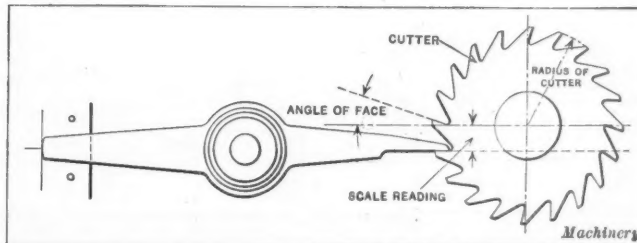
Diagram illustrating how Indicating Lever for Under-cut Teeth is set off Center on Fixture shown in Fig. 47
